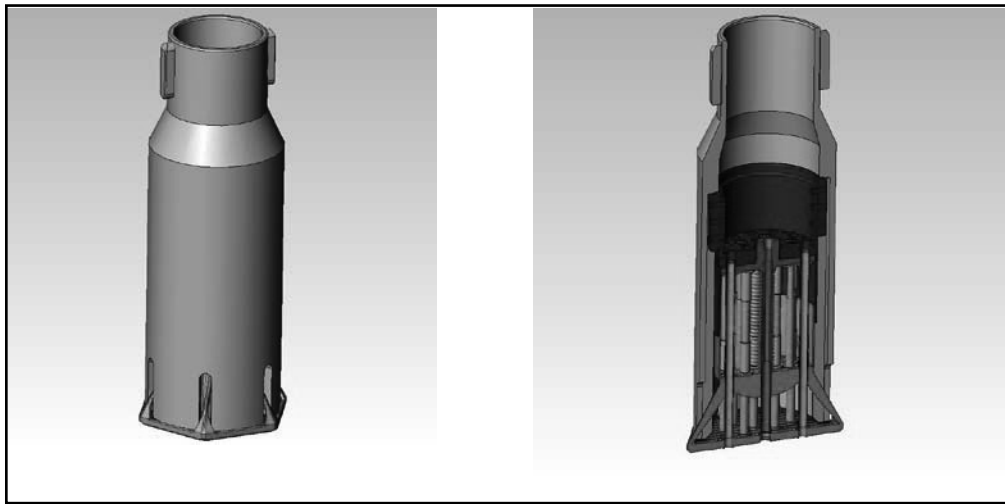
Top nozzle loading guide designed to assist with fuel loading
